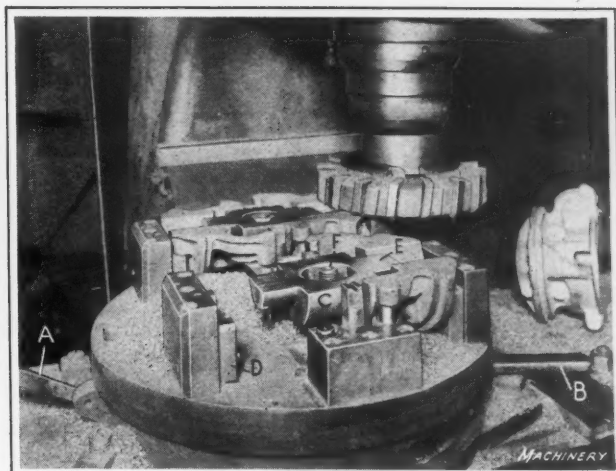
Vertical Milling Machine equipped with Indexing Fixture for facing Joints of Bearing Caps
